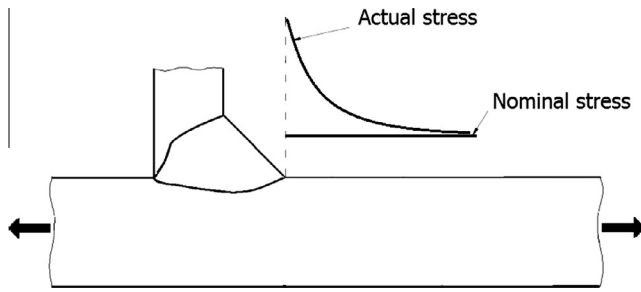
Stress concentration in a fillet welded joint.
